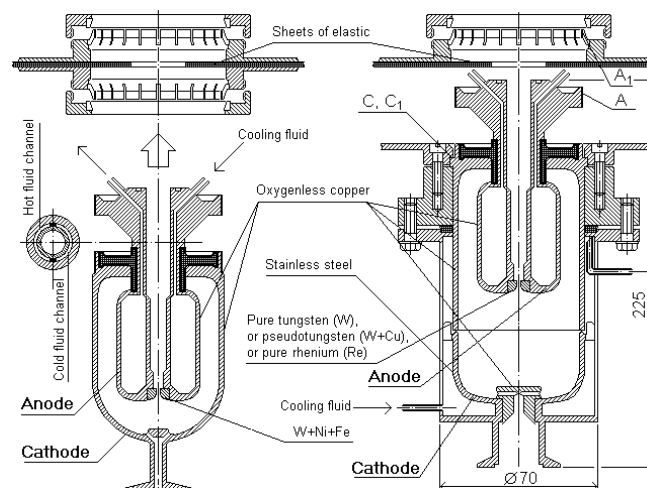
Sectional drawing of DPF chambers with cooling anode and with complete chamber cooling.
